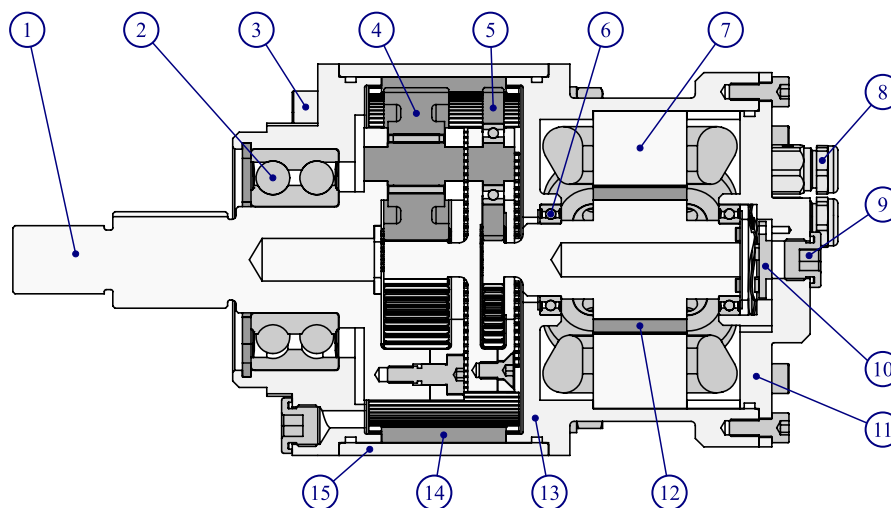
Rotary electromechanical damper actuation unit. (1) input shaft; (2) input bearing; (3) gearbox cover; (4) first stage assembly; (5) second stage assembly; (6) motor ball bearing [$\times 2$]; (7) stator assembly; (8) cable gland [$\times 4$]; (9) drain cap [$\times 2$]; (10) position sensor; (11) motor cover; (12) rotor assembly; (13) motor casing; (14) outer ring gear; (15) gearbox casing.
